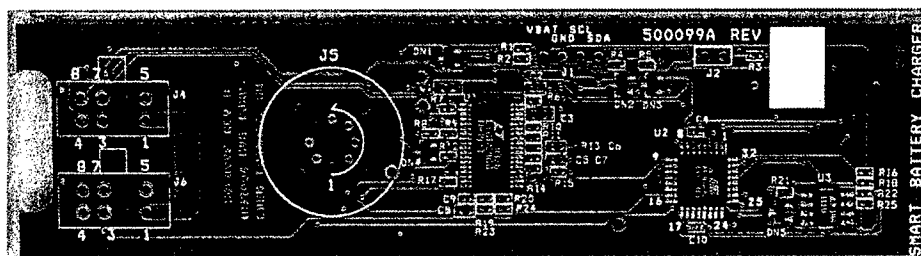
Top side of the 500099F_B PCB. Just to the left of center, is the footprint, J5, for the daisy-chain connector. Other through-hole footprints are for wire attachment.
